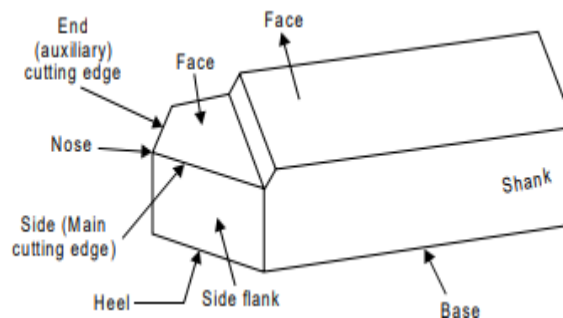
Shows geometry of single point cutting tool(wordpress.com)
